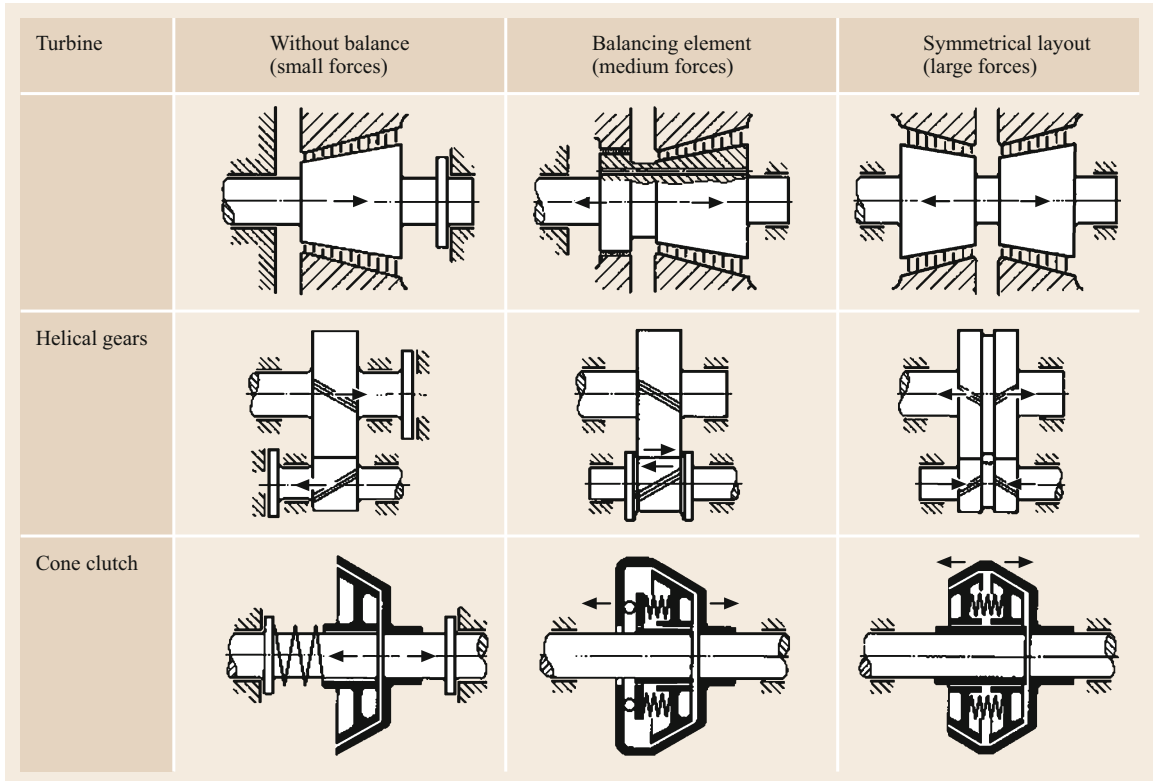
Fundamental solutions for balancing associated forces, illustrated via a turbine, helical gears, and cone clutch (after [16.3])
